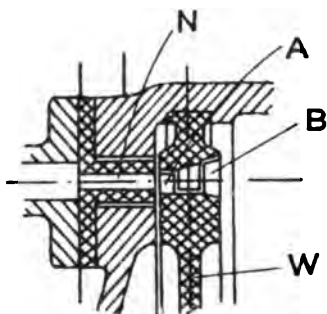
Nozzle and First-stage Vanes of Sulzer Steam Turbine.
